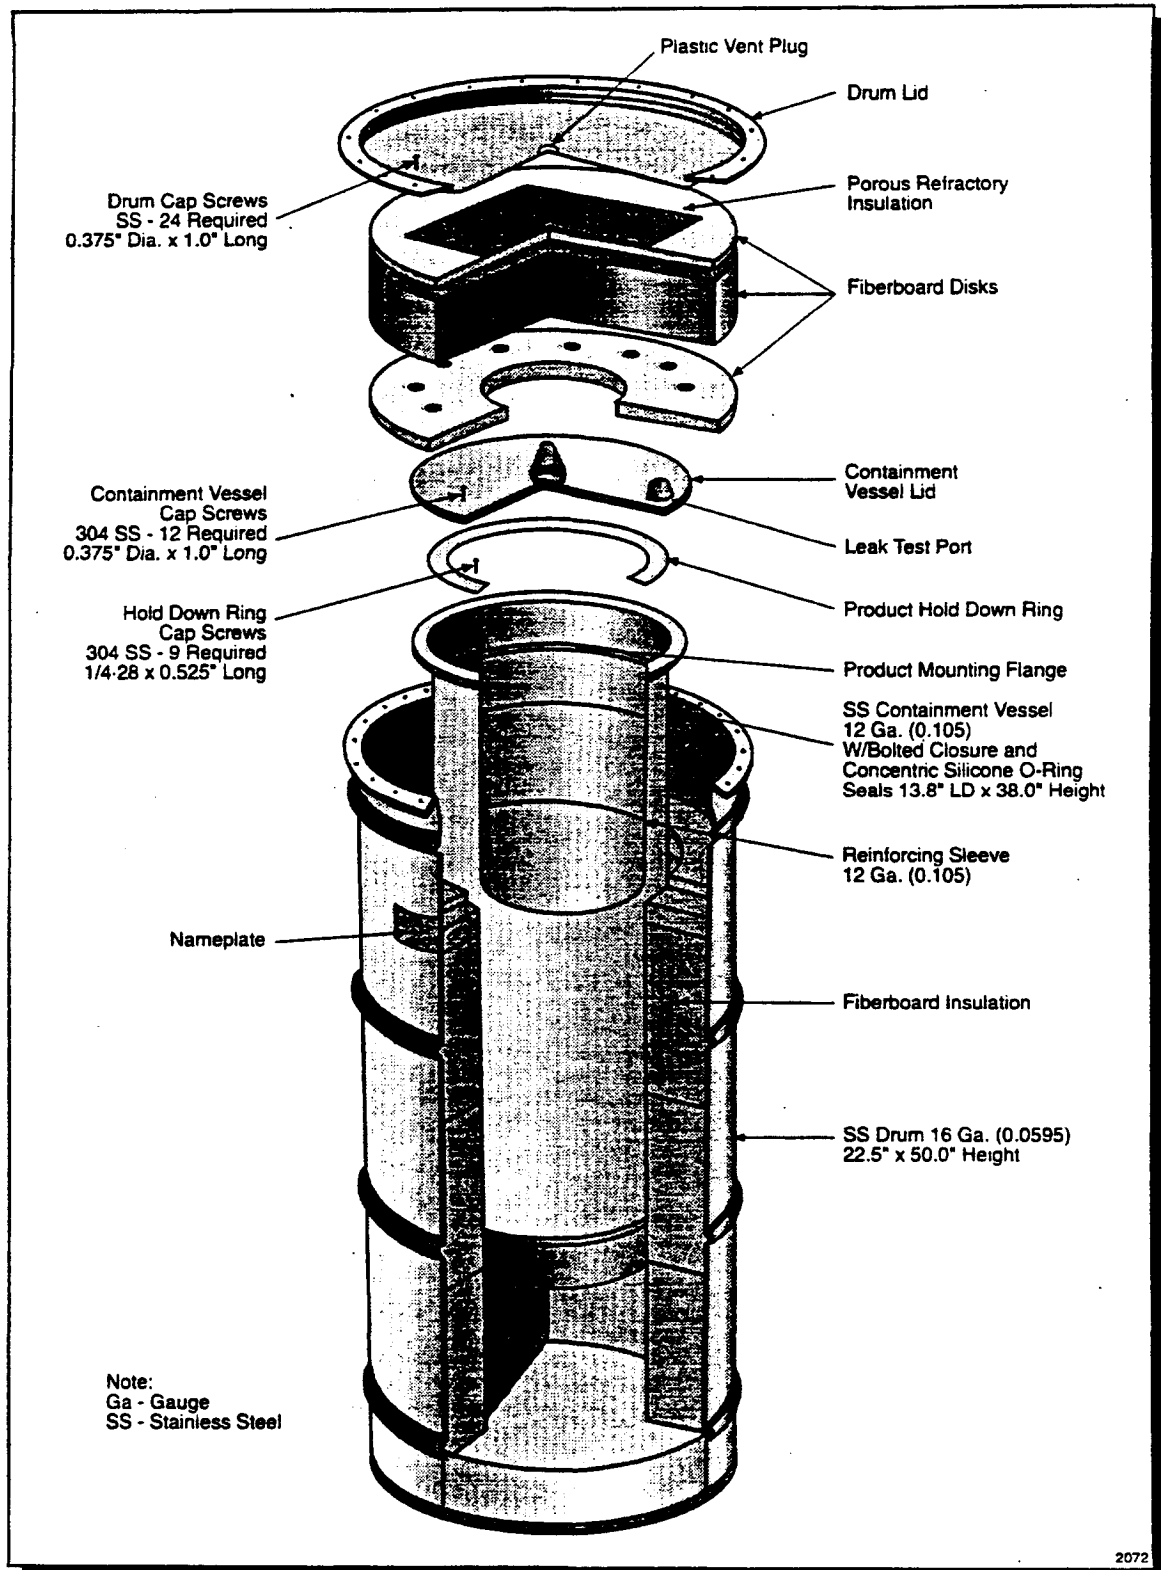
Cross-Sectional View of an FL-Type Container.
